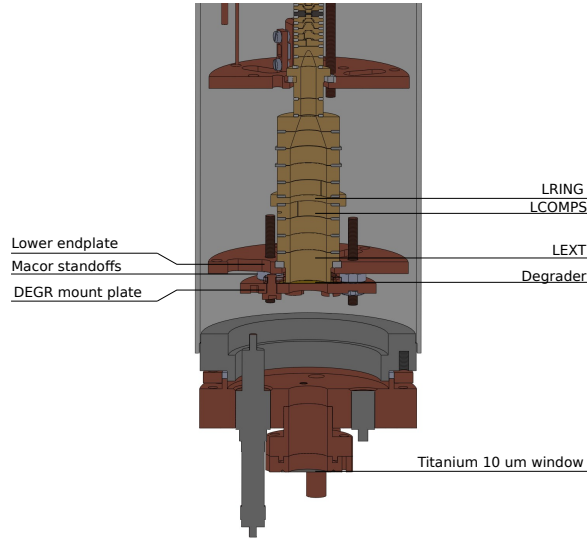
SolidWorks model of the degrader of the new loading trap and degrader assembly mounted inside the trap can
